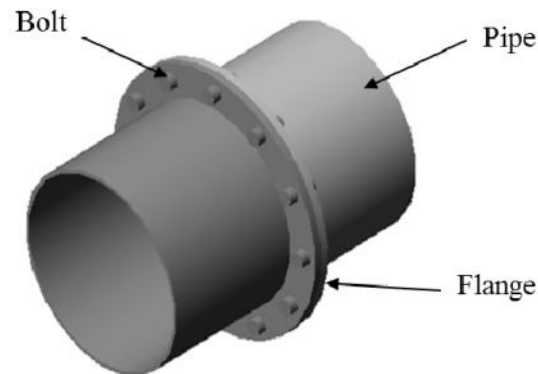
3-D isometric view of a typical flanged pipe joint
